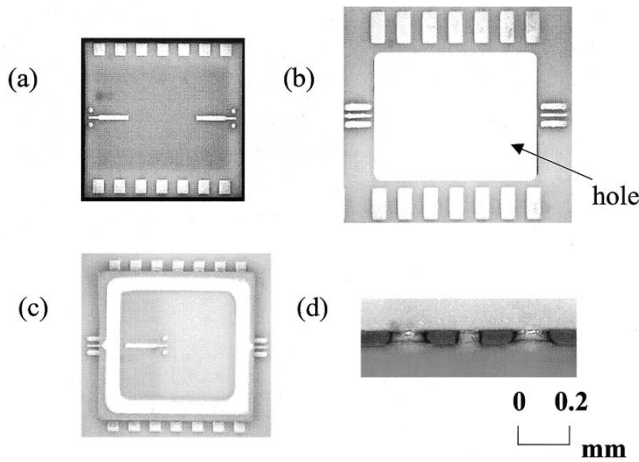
Photograph of prepared samples. (a) The bottom view of the package. The package size is 5.8 mm square  $\times$  0.7 mm. (b) The mounting board. This board has a hole at the center. (c) The top of the surface mounted sample. The center pattern is a probing terminal. (d) The cross section of the interconnection. The gap between the package and the board is 0.05 mm.
